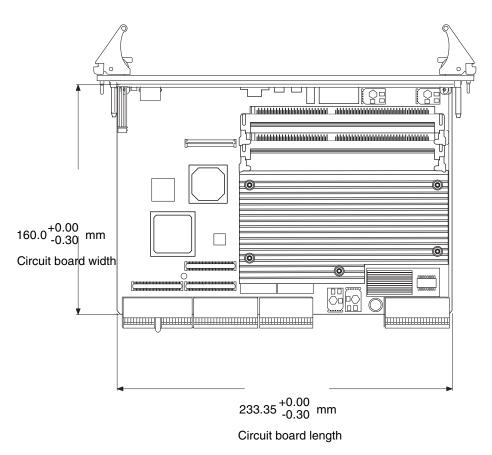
Mechanical Dimensions of the Netra CP2500 Board
